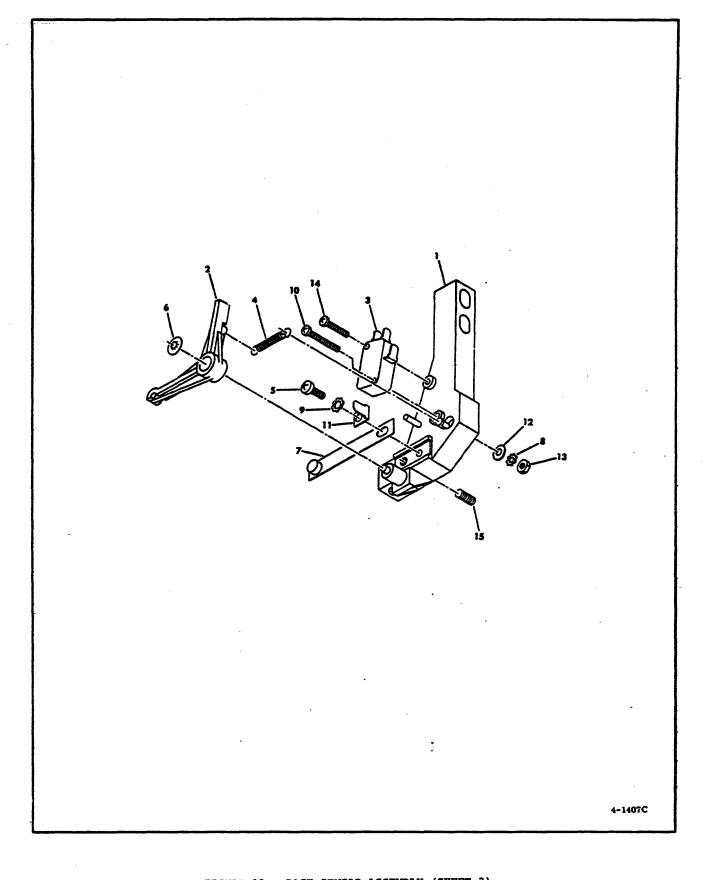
PACK SENSOR ASSEMBLY (SHEET 2) S/C 23 AND ABOVE
